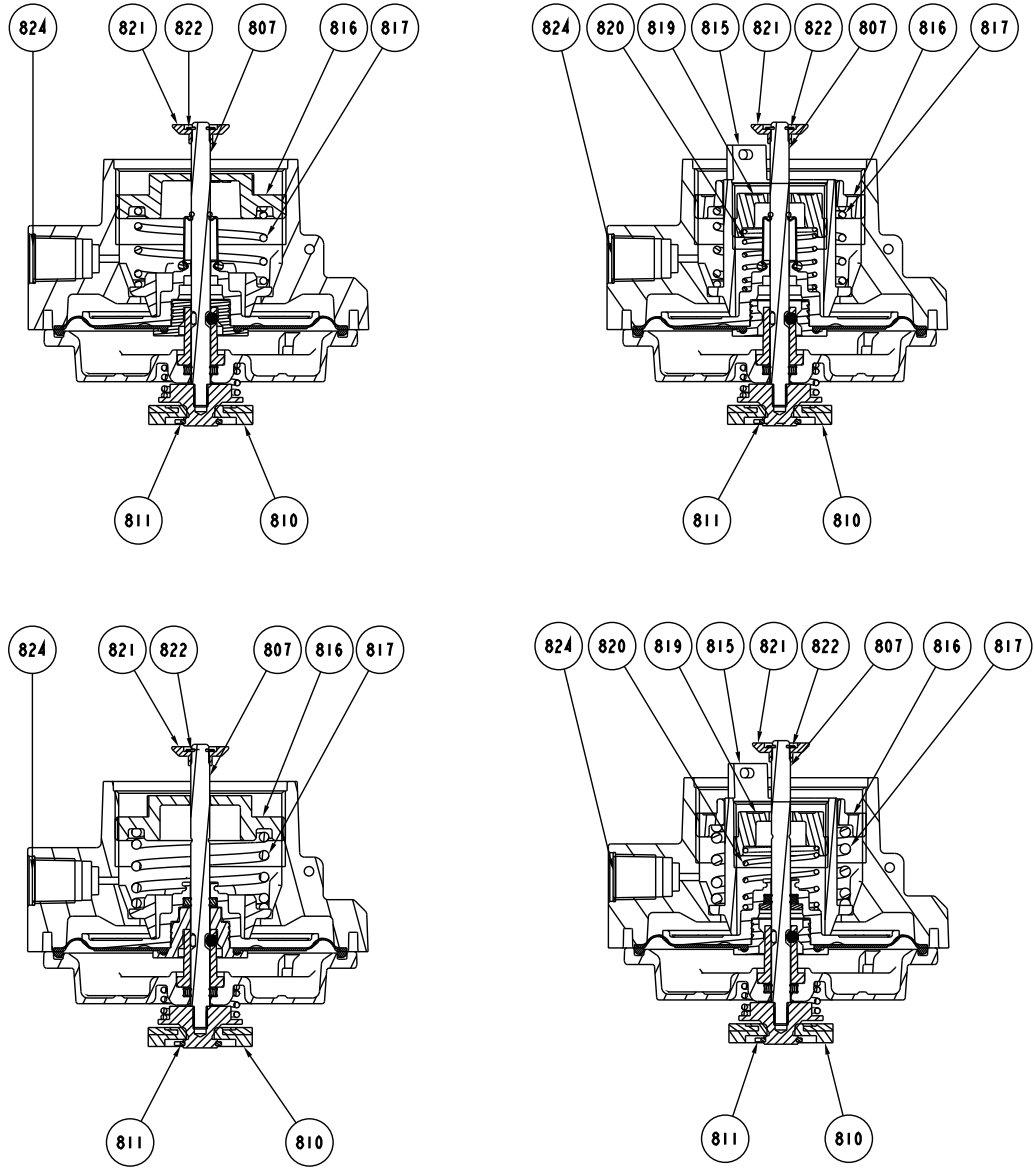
SSV Assemblies. BP Assemblies in Top Row, MP Assemblies on Bottom Row. OPSO Only on Left, OPSO/UPS on Right.
